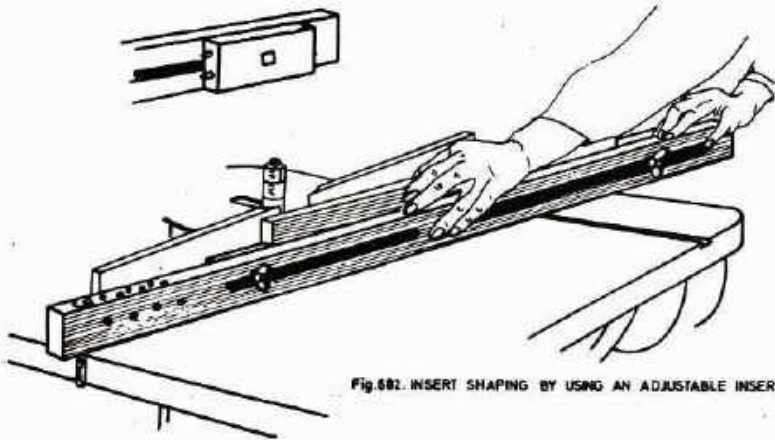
INSERT SHAPING BY USING AN ADJUSTABLE INSERT DEVICE
